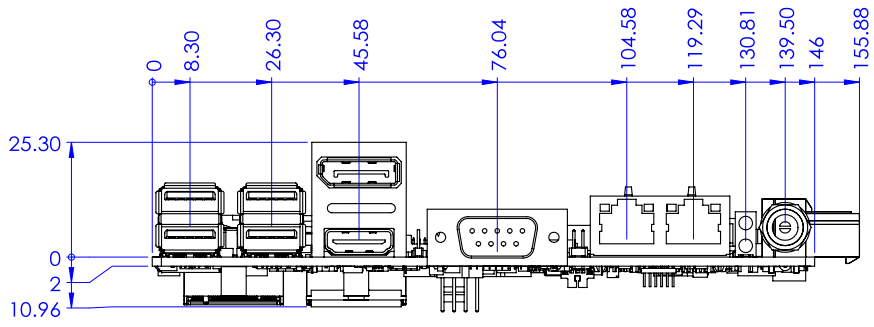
MIO-5393 Mechanical Drawing (Coastline)
